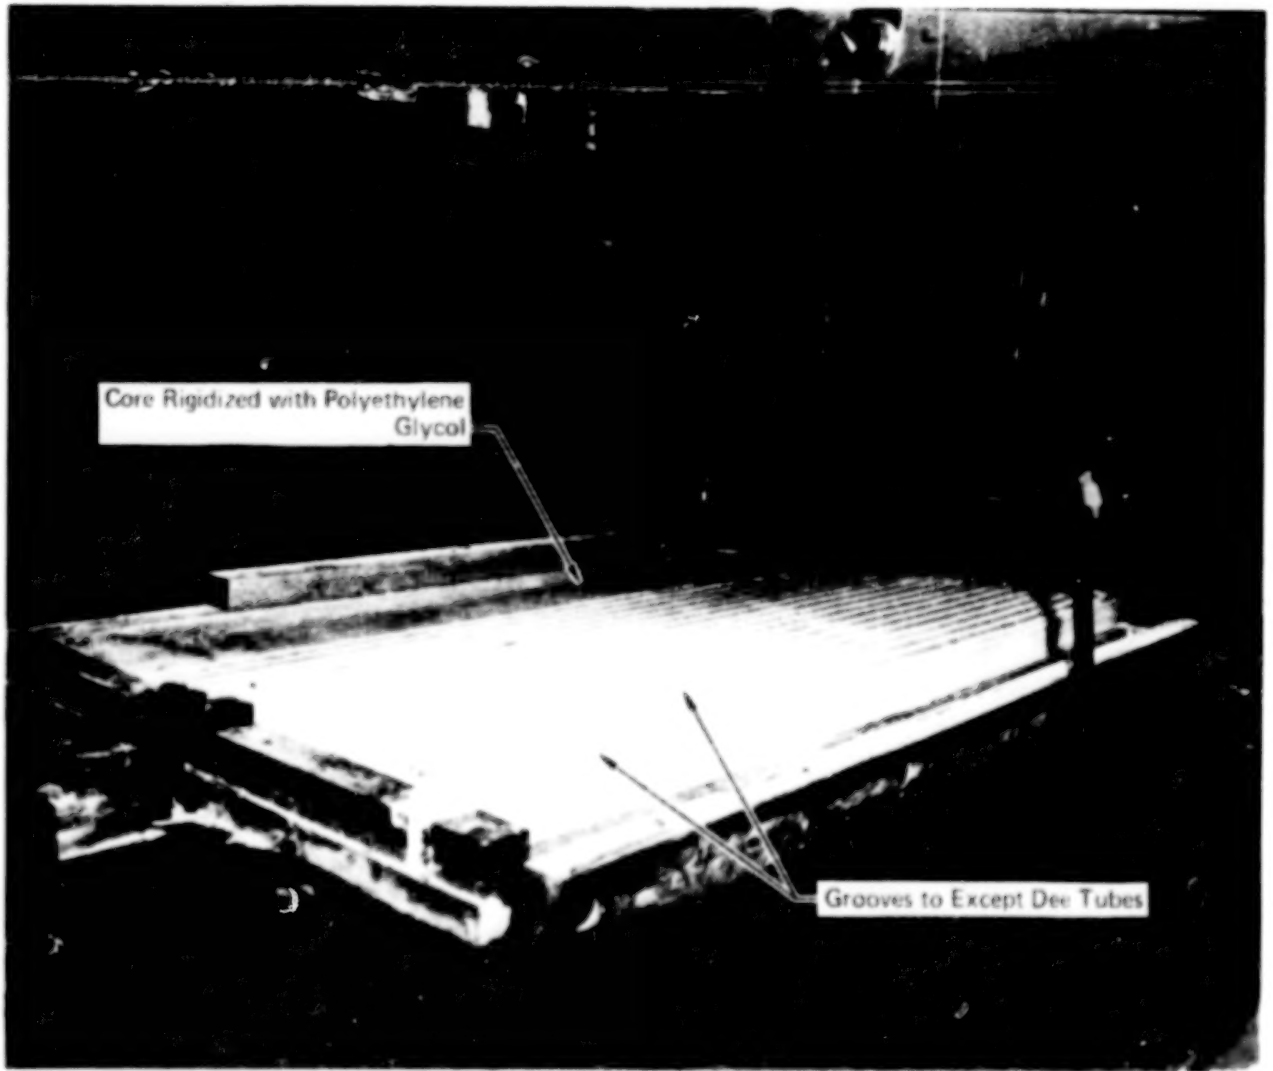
MACHINING OF HONEYCOMB CORE
